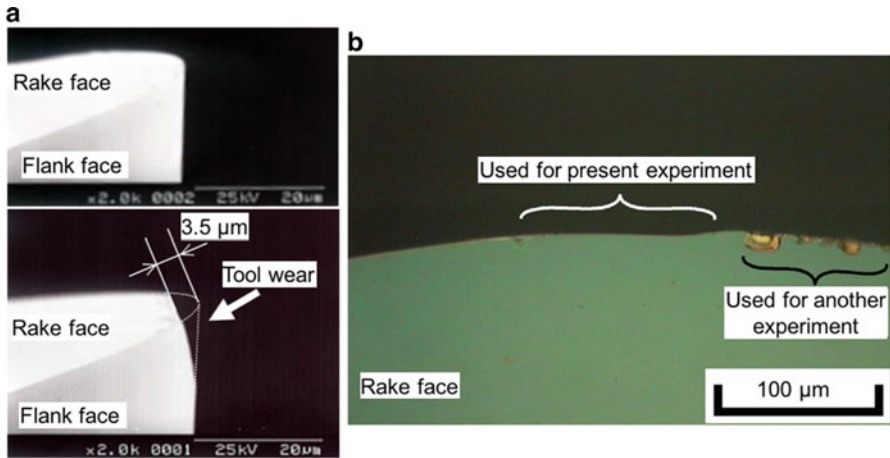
Tool wear. (a) SEM photographs of cutting edge before and after ordinary cutting experiment (upper, before cutting; lower, after cutting) (b) Microphotograph of cutting edge after elliptical vibration cutting of 1110 m
